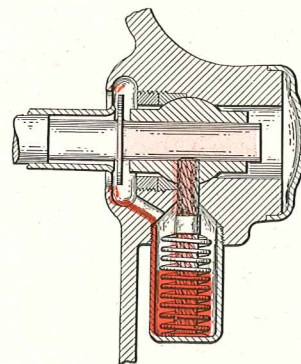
Bottom-feed wick oiled bearing for small motor.
